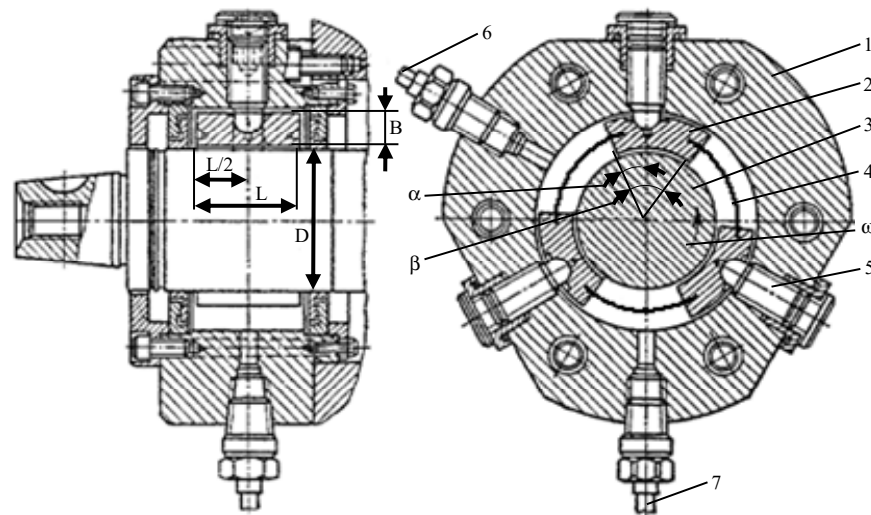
The principal construction of tilting pad bearing with elastic elements between tilting pads: L—tilting pad width; D—rotor diameter; 1—body; 2—tilting pads; 3—rotor; 4—elastic element; 5—adaptive restraint; 6—oil drain nozzle; 7—oil inlet nozzle.
